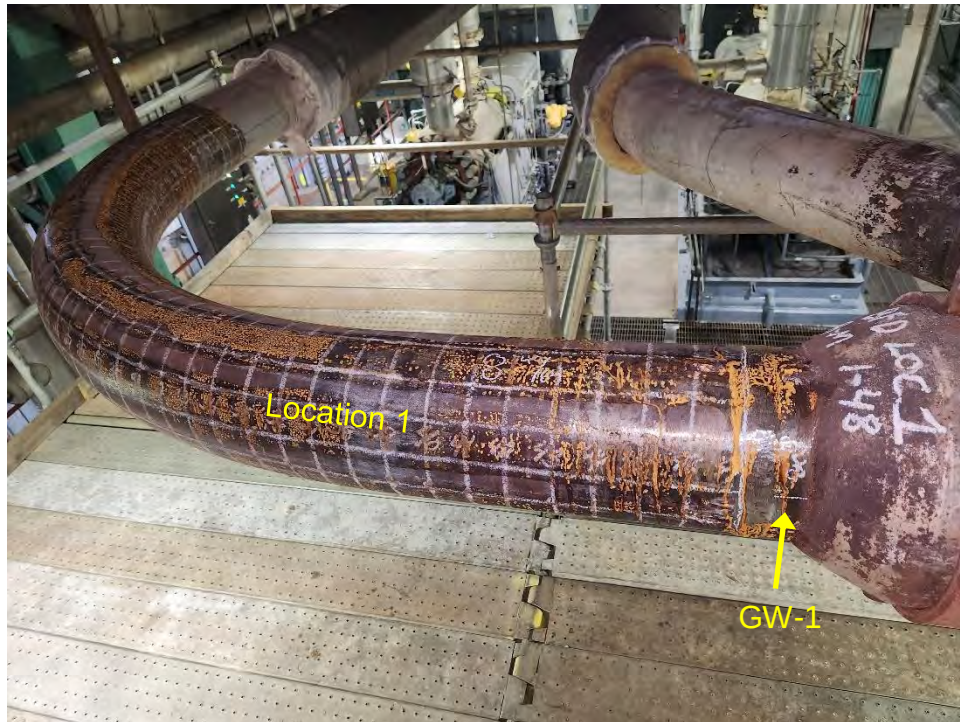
Photographs of the inspection locations on the Boiler Feedwater Discharge piping system.
